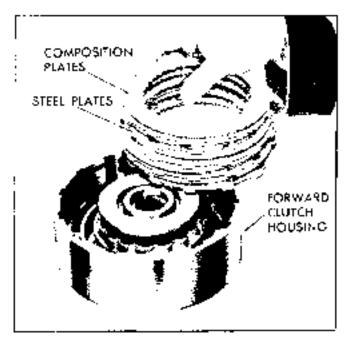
Testa IIIng Forward Clutch Composition and Sheet Plates
